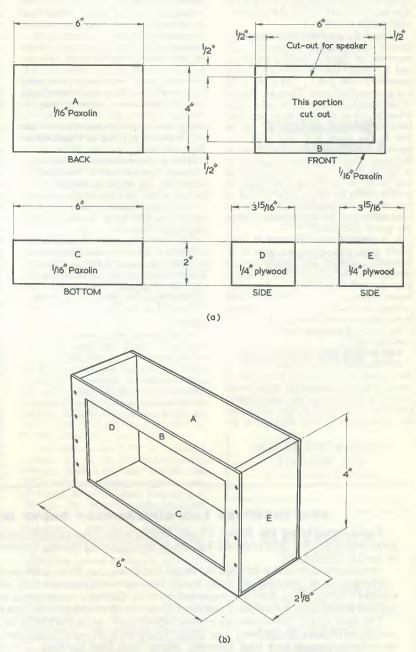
(a). The five parts used for making the cabinet (b). The cabinet completed. The assembly of Figs. 2 and 3 is dropped in from the top, with expanded metal inserted between the speaker board and the cut-out in the front of mounting bracket for the board may, of course, do so. It is convenient to mount the components on the board, and to apply "Contact" or similar material to its back, before fitting this in position. Note the connections, in Fig. 2, from T_1 to the speaker. T_1 may be secured to the board with adhesive.
